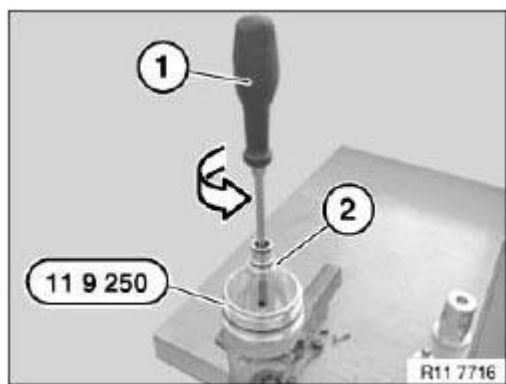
Identifying Screwdriver With Special Tool (11 9 250)
